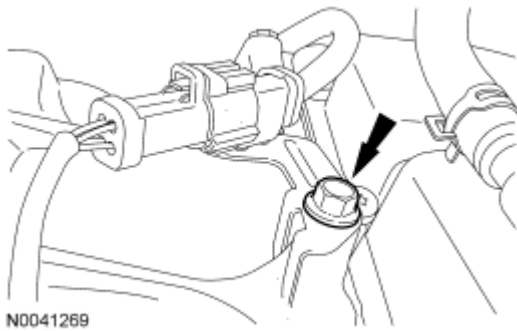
Locating Catalyst Monitor Sensor (CMS) Electrical Connector Bracket Bolt
